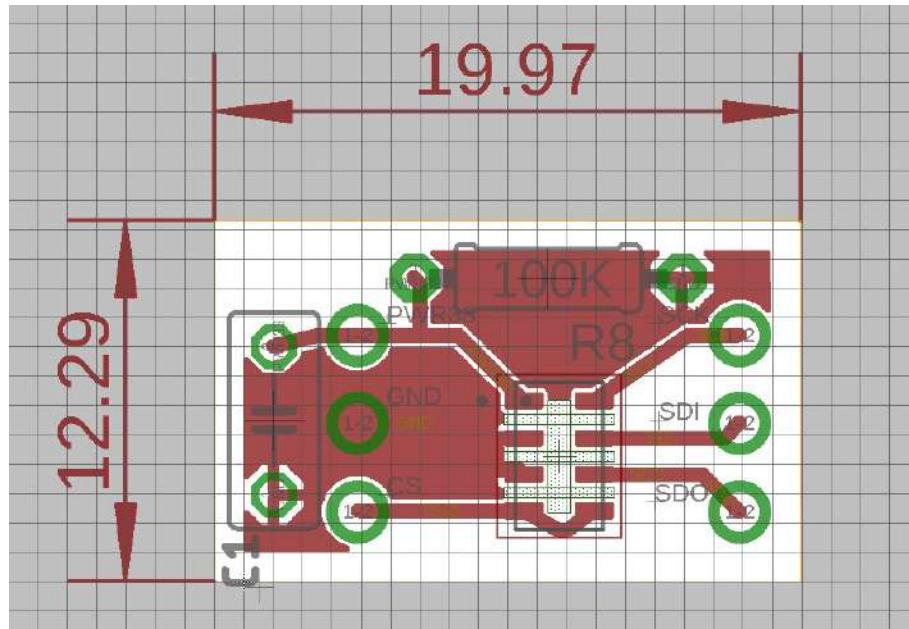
Barometric pressure sensor PCB top layer Layout in Eagle.
